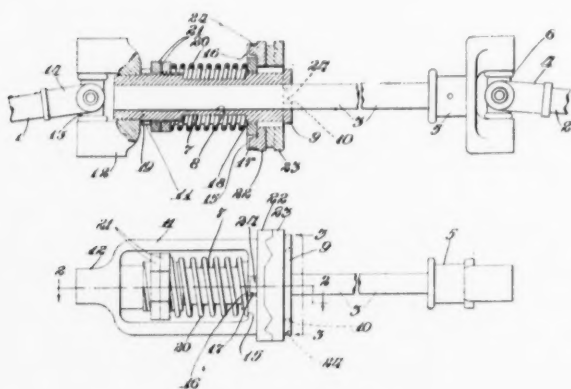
Two universal joints and an overload slip clutch provide flexible shaft
